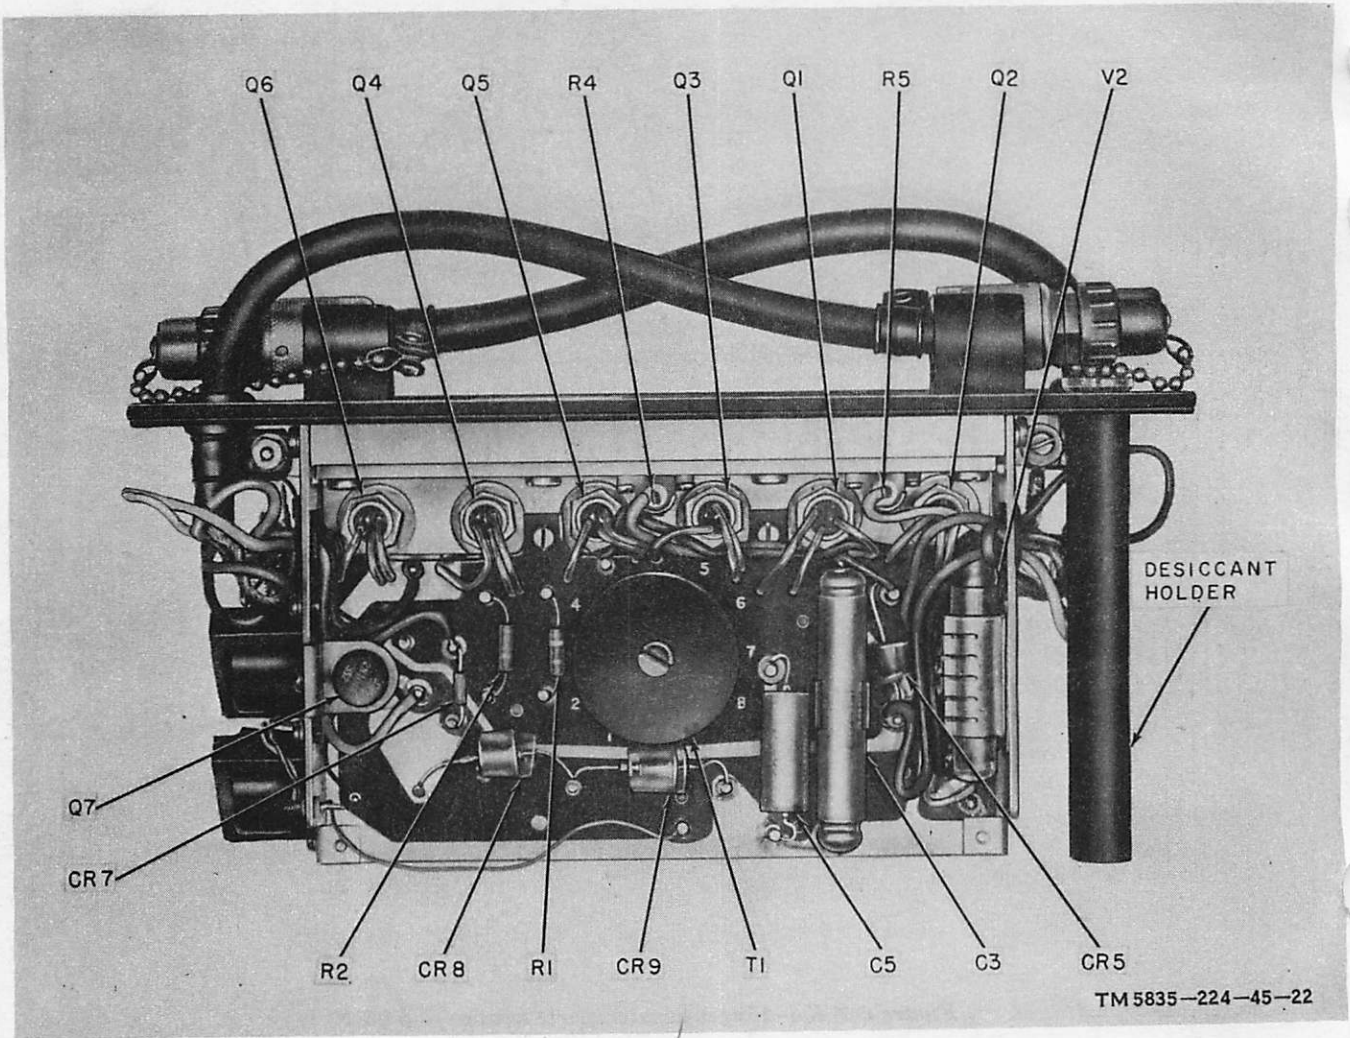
KA-3 keyer adapter, parts location, bottom view.
